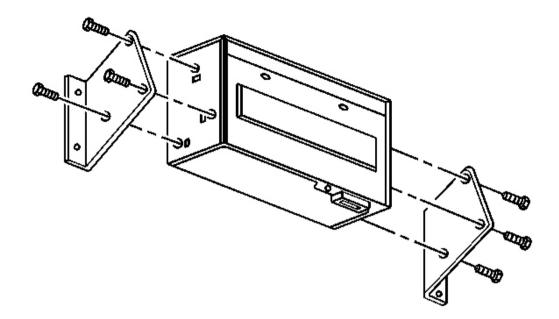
CD Mounting Brackets & Bolts Courtesy of GENERAL MOTORS CORP.
